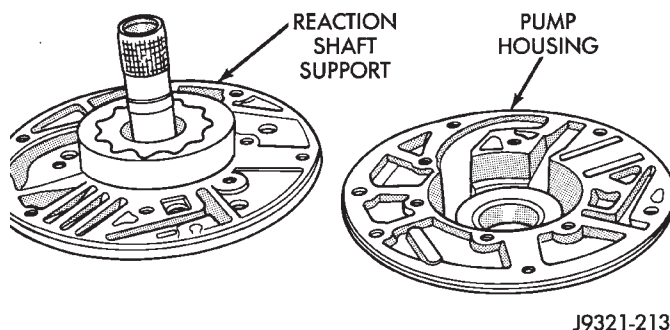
Separating Pump Housing From Reaction Shaft Support
